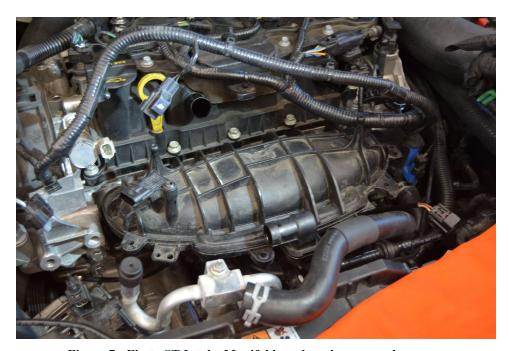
Fiesta ST Intake Manifold ready to be removed
